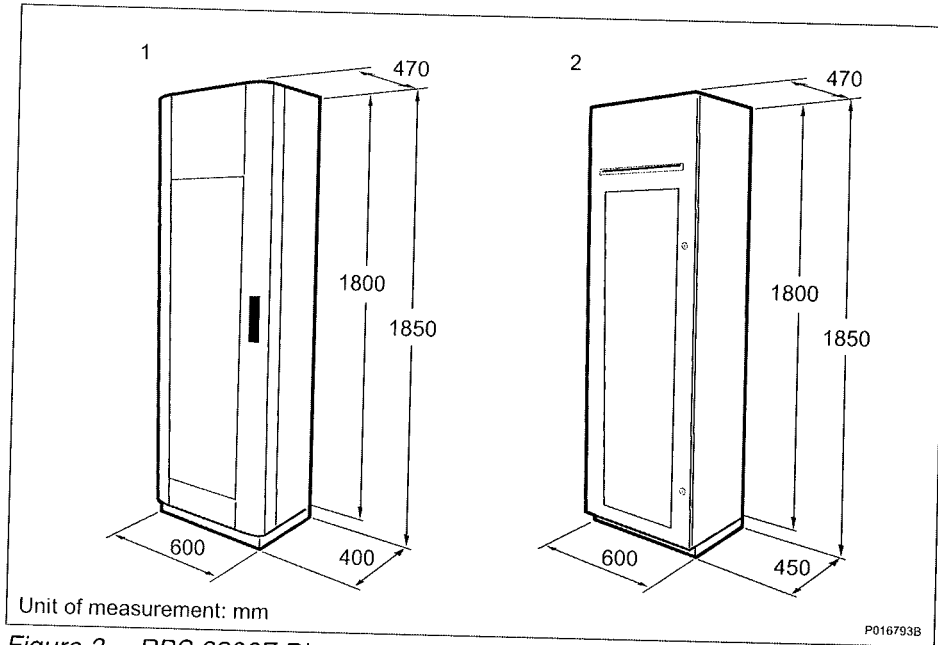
RBS 3206F Dimensions for the Two Cabinet Versions
